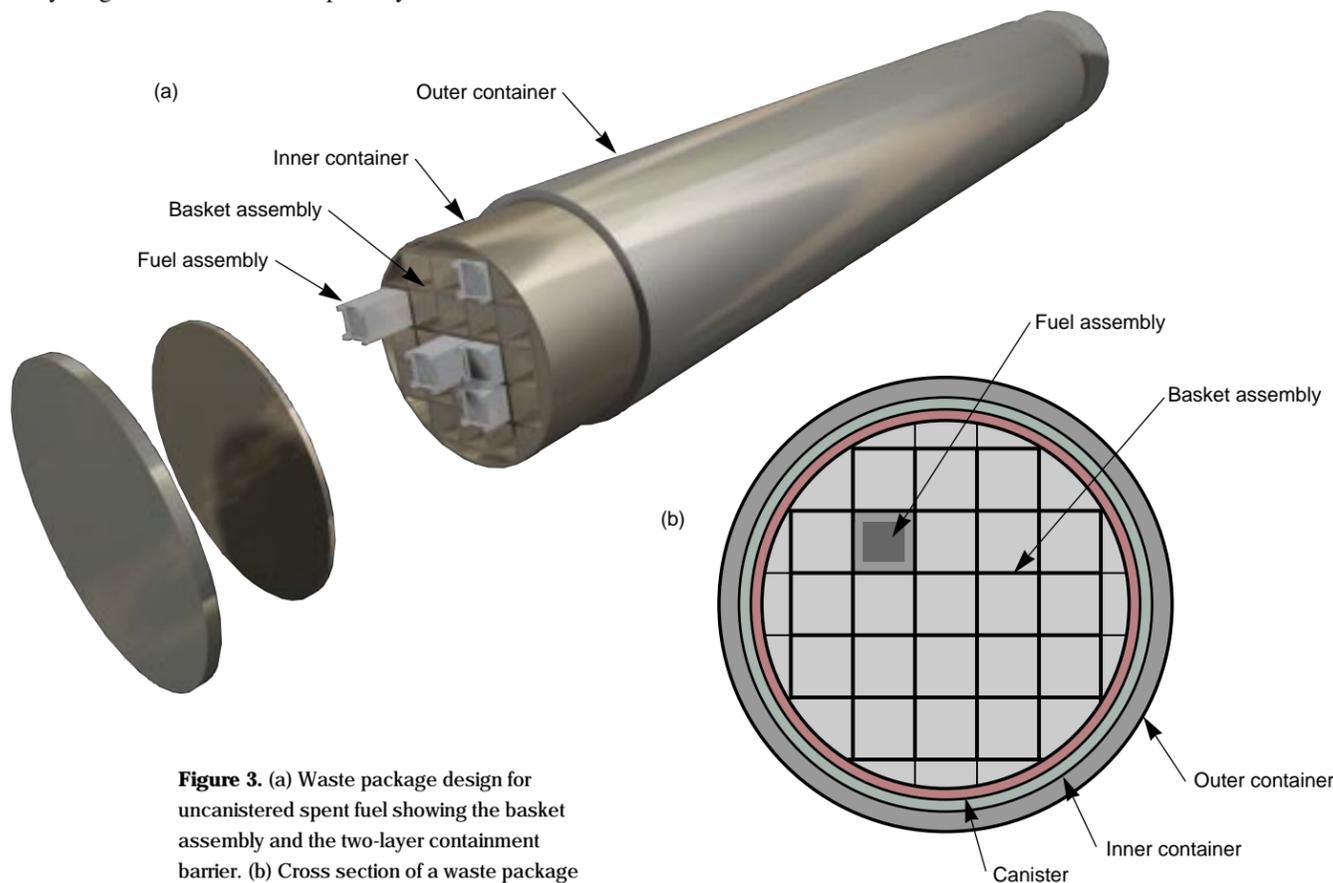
(a) Waste package design for uncanistered spent fuel showing the basket assembly and the two-layer containment barrier. (b) Cross section of a waste package containing a multipurpose canister used for transportation, storage, and disposal.
